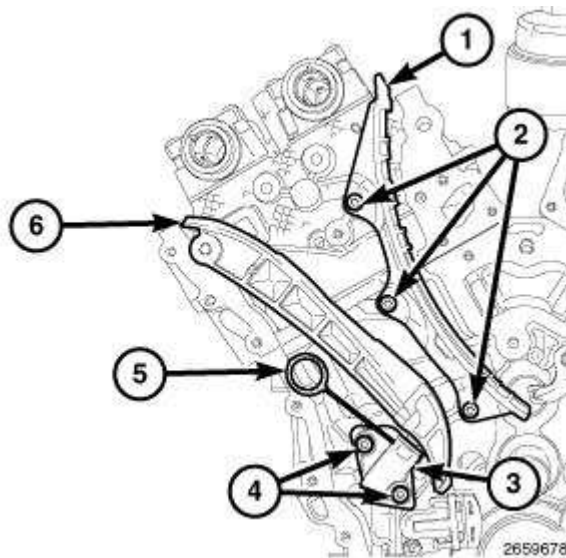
Right Cam Chain Tensioner, Arm, Guide & Bolts
